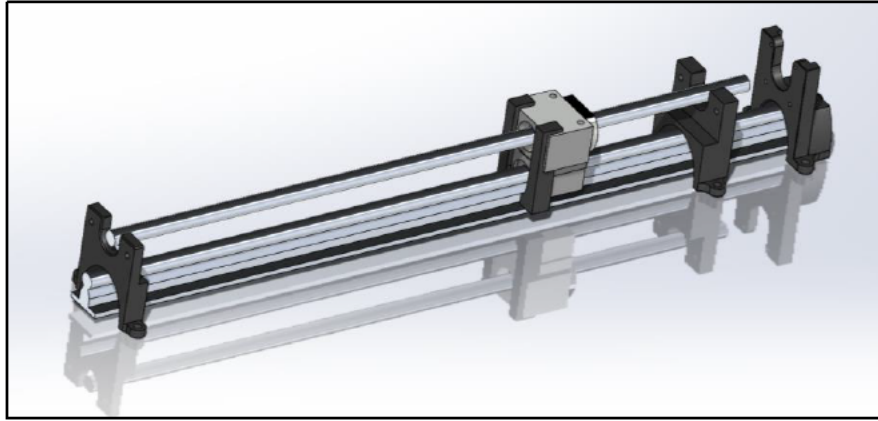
3D image of the assembly model of the linear actuator system comprising the 3D printed mounting brackets.
